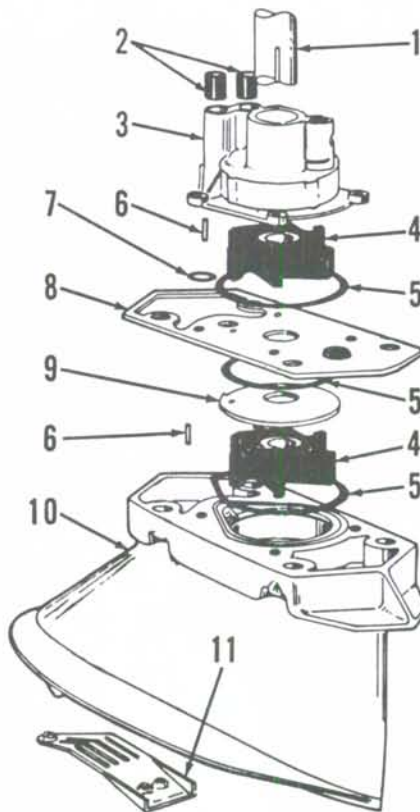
Exploded view of pump housing and associated parts used on Fleet Scott models.
